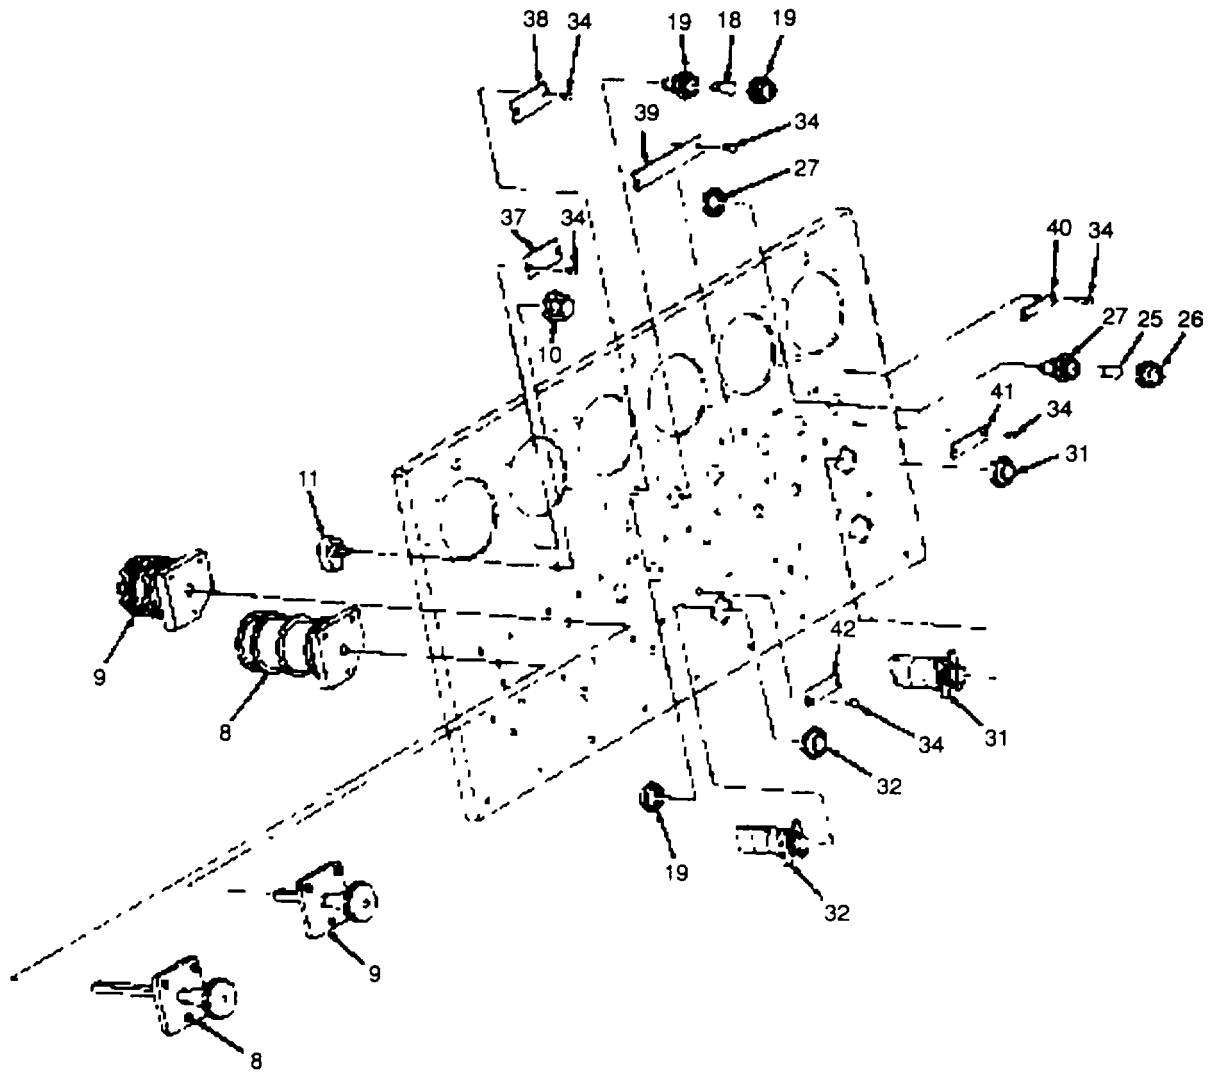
Remote Control Module, Door Assembly (Sheet 2 of 4)
